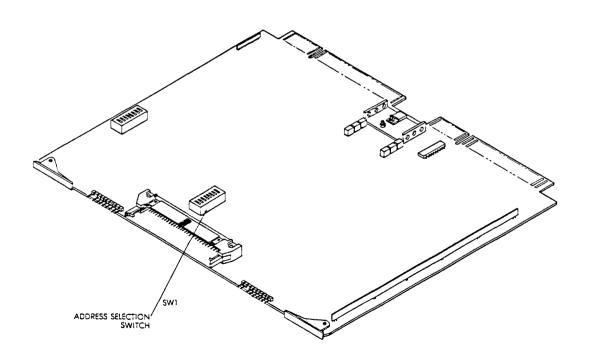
SI 9784 Address Switch Location on CQFM PCB
